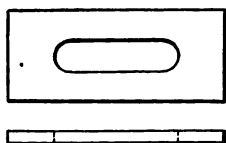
A Piece of Work for which the Punch Should be Provided with Shear
